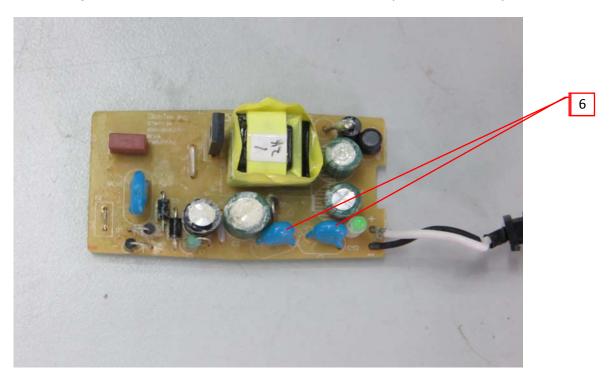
Component side view of PCB of model GT*96060(Fourth structure)
